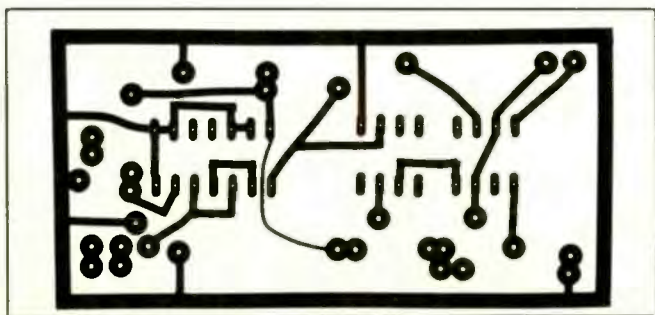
This is the actual-size etching-and-drilling guide to use for home fabricating your own printed-circuit board.
